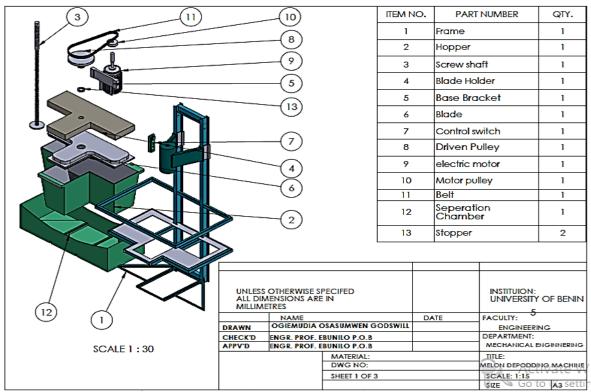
Exploded view of labelled melon depodding machine To design for the power required to operate the machine, Equation 5 can be employed [21].
